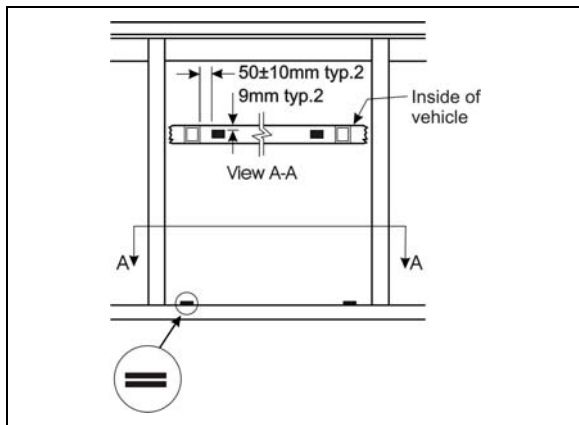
AWNING WINDOW - RUBBER BUMPER INSTALLATION
